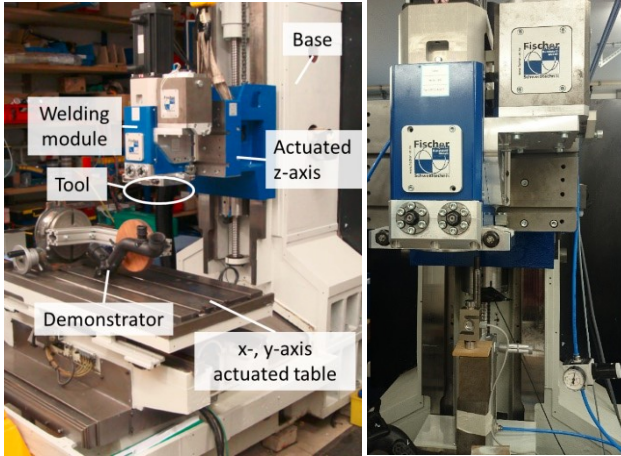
Flexible joining center prototype (left), friction welding module in detail (right).
